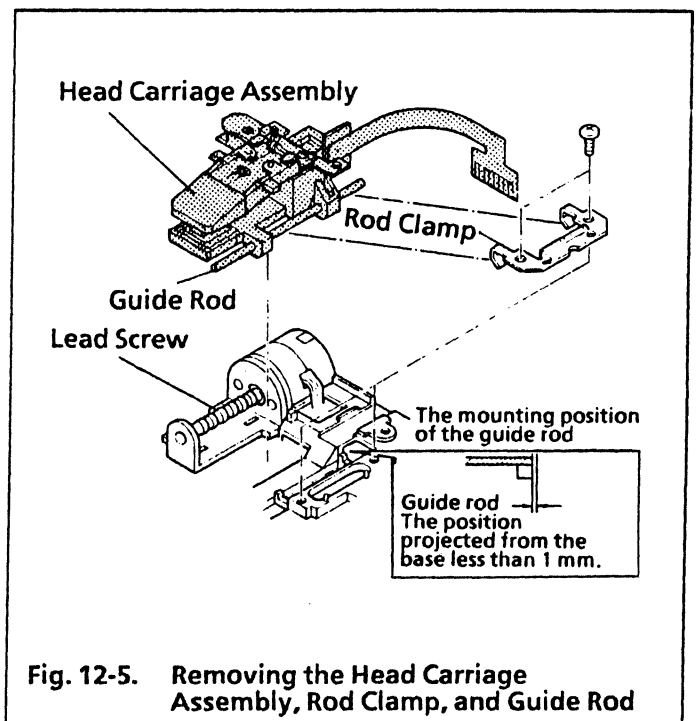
Removing the Head Carriage Assembly, Rod Clamp, and Guide Rod
